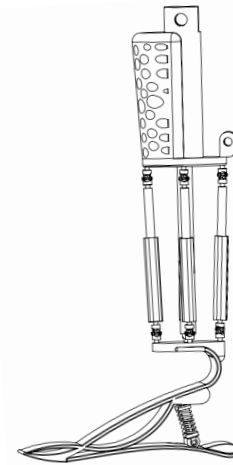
Design of the Stewart mechanism in the lower limb prosthesis prototype.
